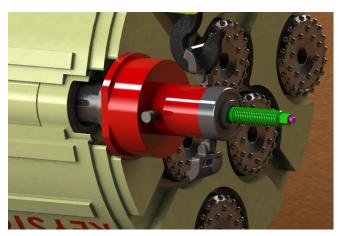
Bit Removal: Remove ³/₄" Nut and Acme Nut
